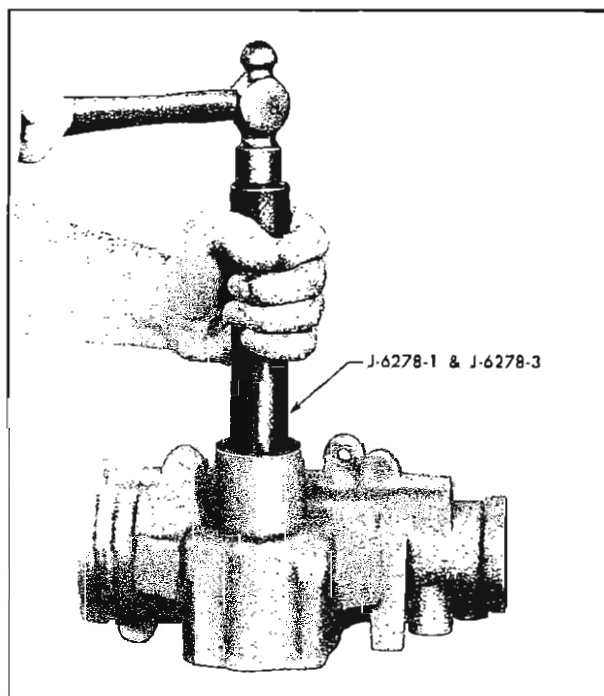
A-17 Removing Pitman Shaft Needle Bearing
